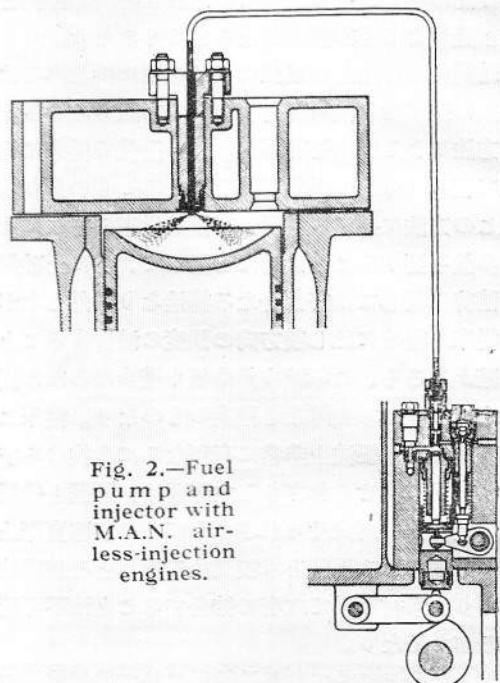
Fuel pump and injector with M.A.N. airless-injection engines.
